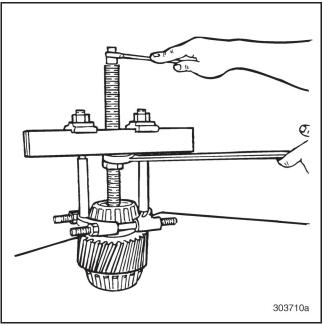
Removing Front-Driving Shaft Rear Bearing Cone
